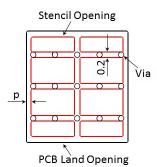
Stencil Openings Shall not Cover Via Areas If Possible (Dimensions are in mm)
